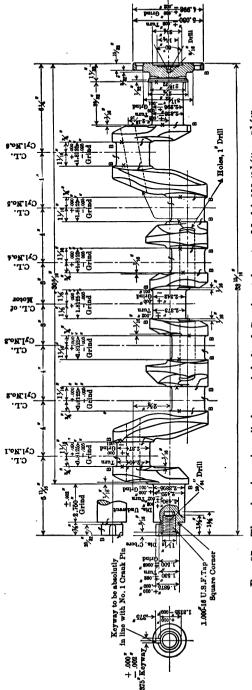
Three-bearing, six cylinder crankshaft of Continental motor Model 9N (3½" × 5¼").
